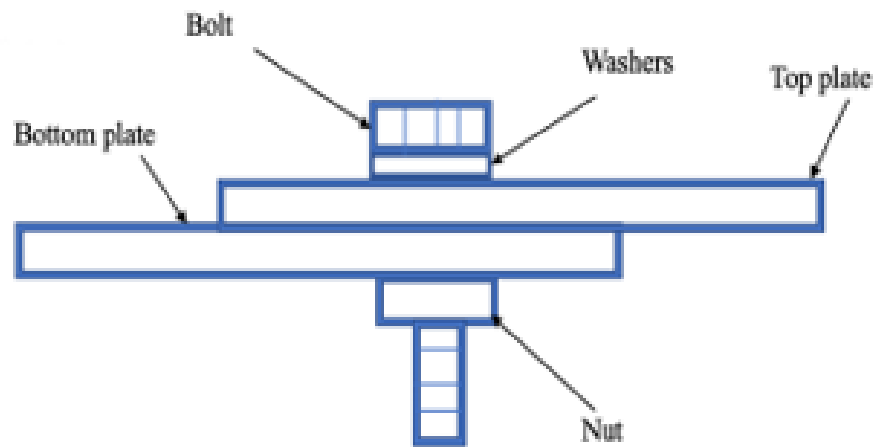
Illustration of a Lap Joint with a Single Bolt.
